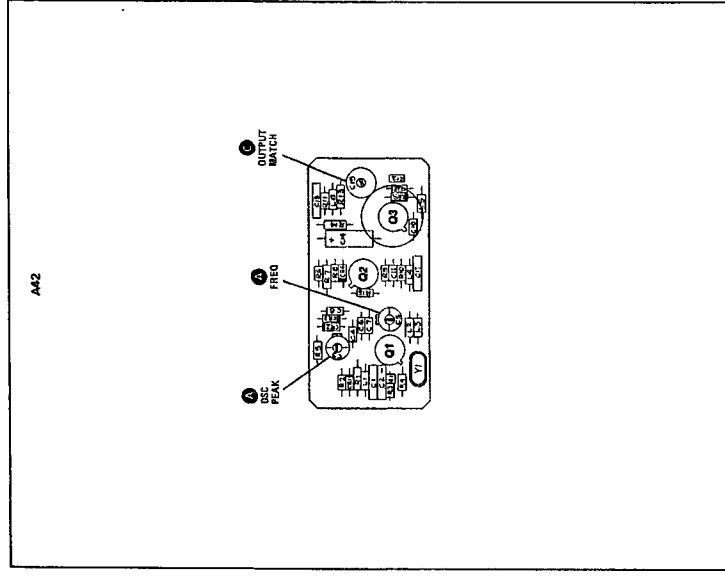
Comb Generator Assembly (Option 001), Component Locations
